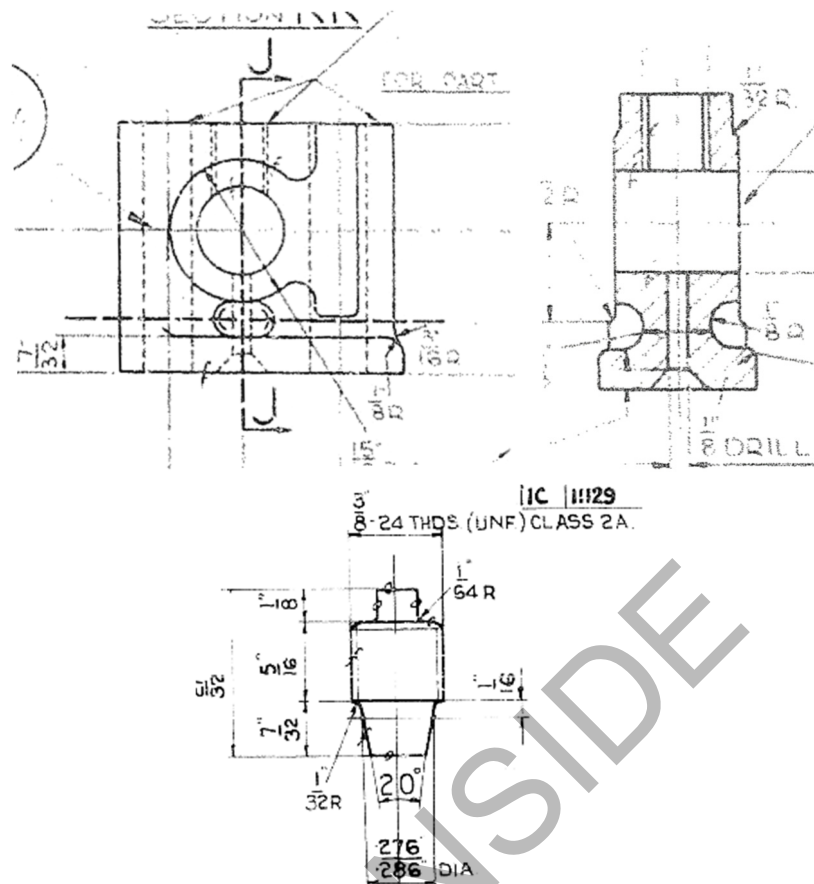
Rocker arm pedestal 2A22 and location screw 2A258.
